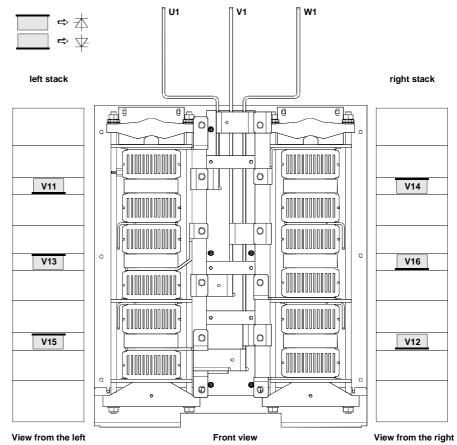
Location of thyristors in frame A5 (2-Q bridge)
